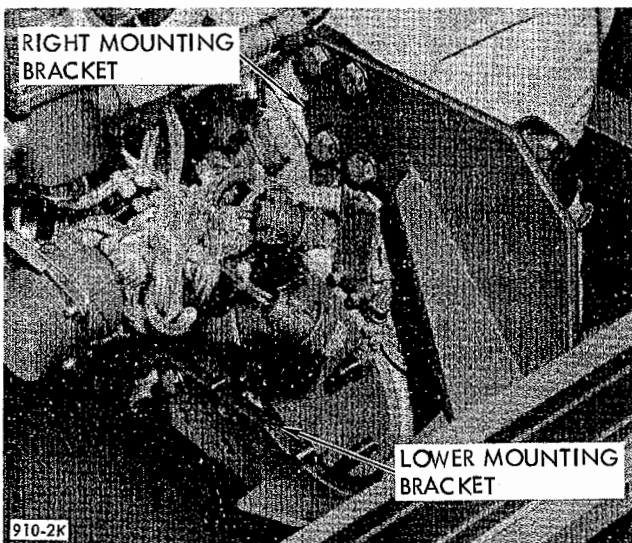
Preparing Engine for Buildup (Metal Shipping Container) (Sheet 1)
